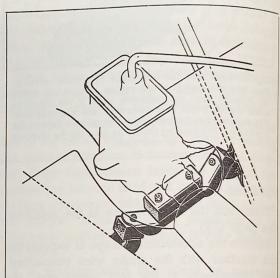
The rear mounting, showing engine unit flexibly supported on a floating cross-member.
